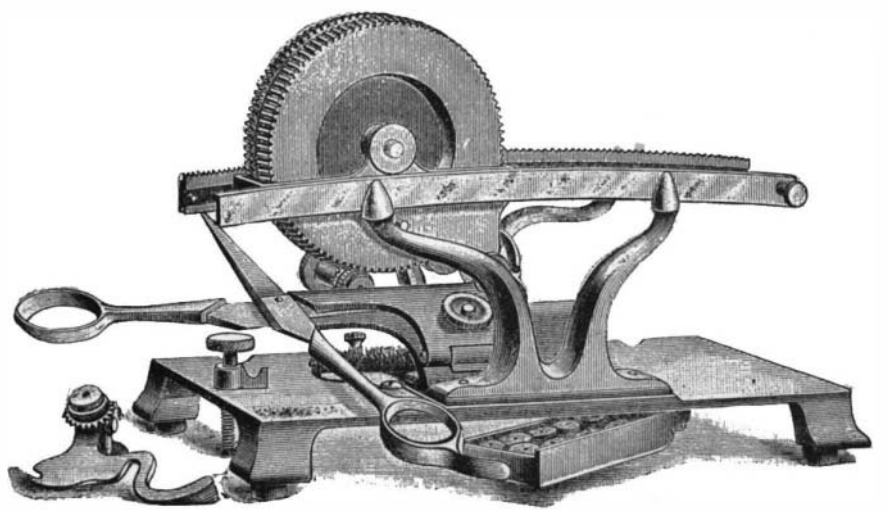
THE MACHINE ARRANGED FOR SHARPENING SCISSORS.
